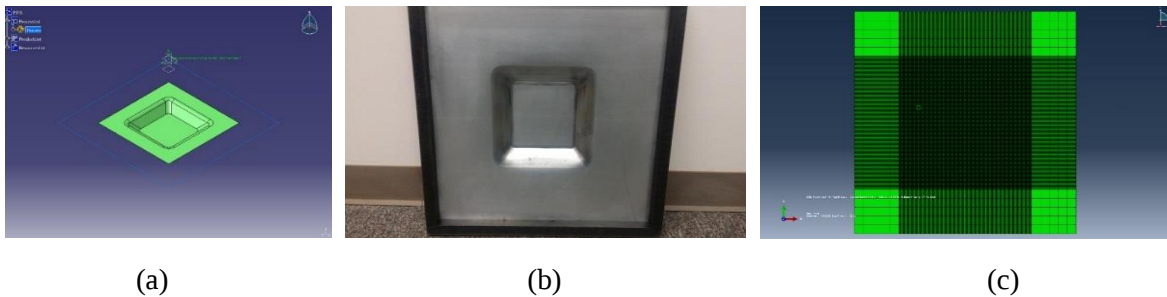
(a) CAD part (b) the formed part(c) Meshed sheet
